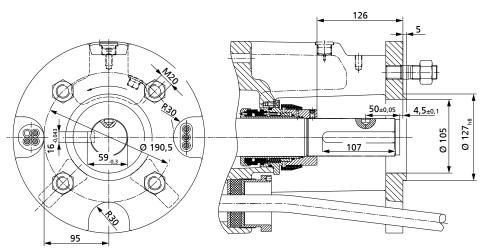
UMA 300 (2-pole) mating dimensions in [mm]
